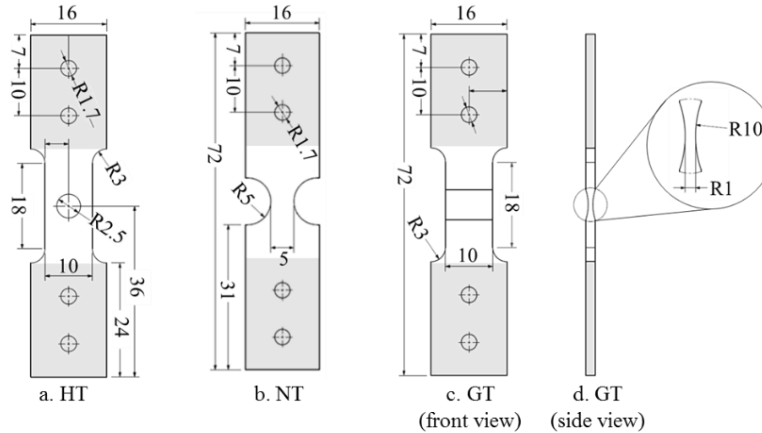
Specimen geometries used for the tests ranging from low to high: (a) hole tension specimen, (c) notch tension specimen, (d) front view of the groove tension specimen and (d) the front view of the groove tension specimen. Grip area is shown with the shaded regions. Dimensions are in mm.
